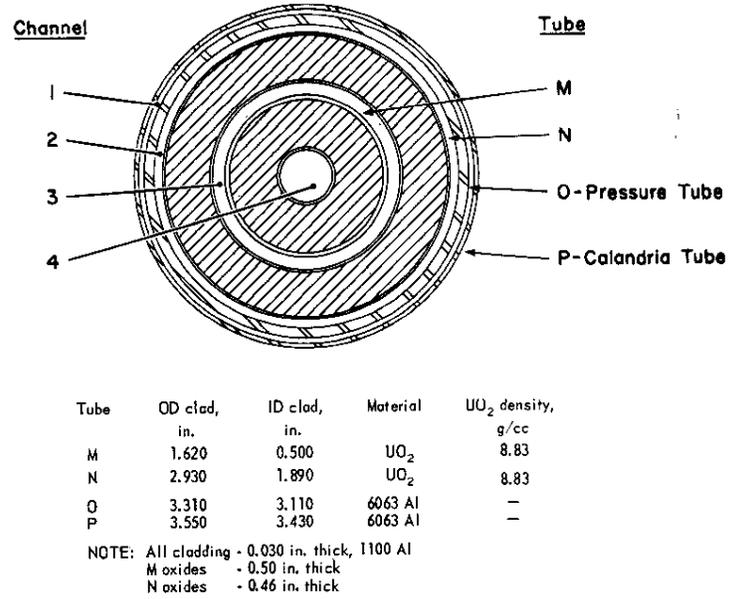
CROSS SECTION OF TEST FUEL ASSEMBLY
